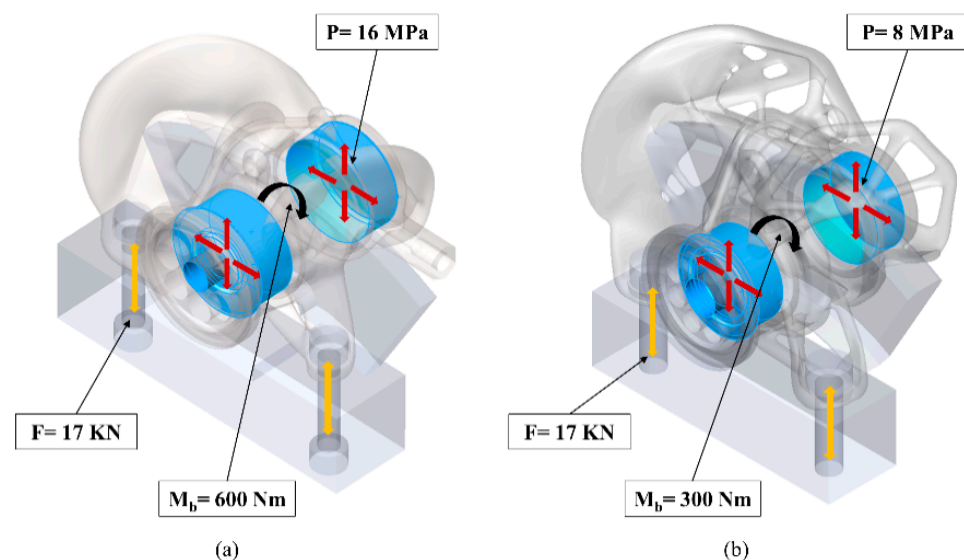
The used assemblies for the validation studies with their loads and boundary conditions: (a) Assembly of the front caliper, (b) Assembly of the rear caliper.
